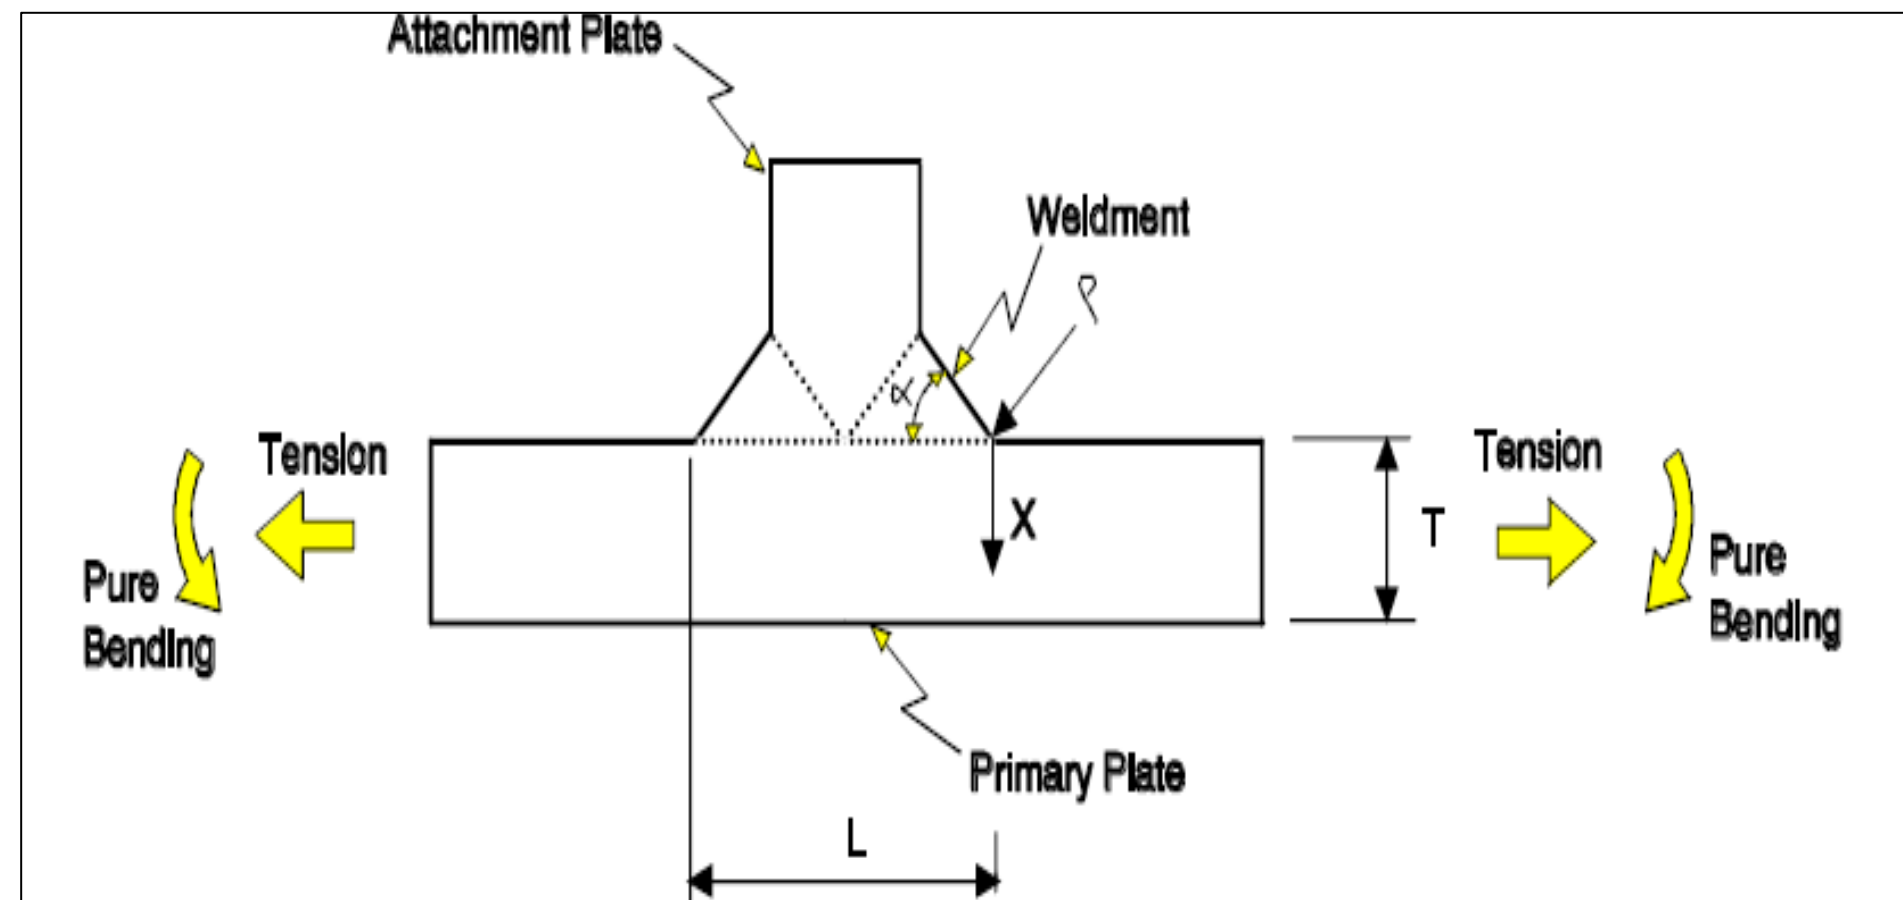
Schematic geometry of T-butt weld specimen [2].
